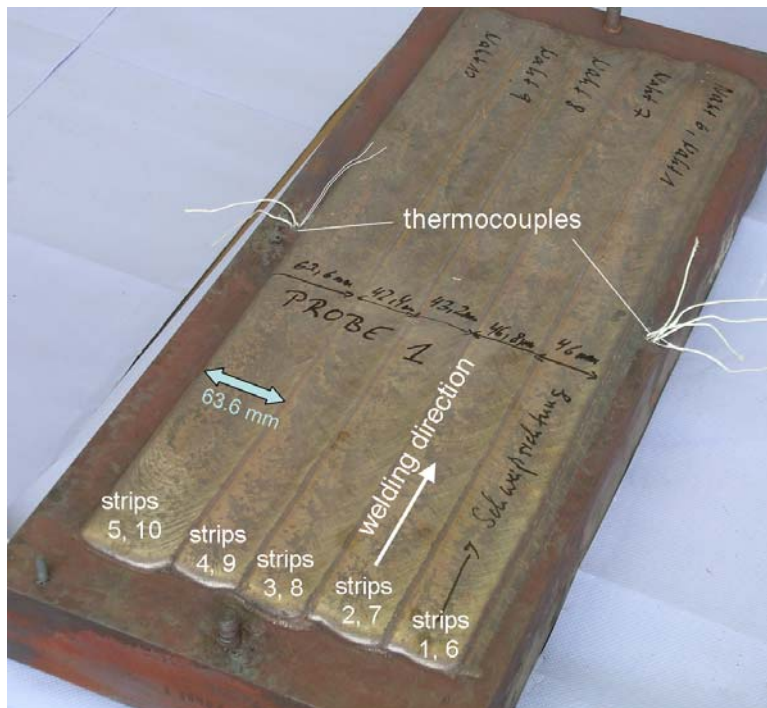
Cladded plate showing the strip welds and the thermocouples used for temperature measurement
